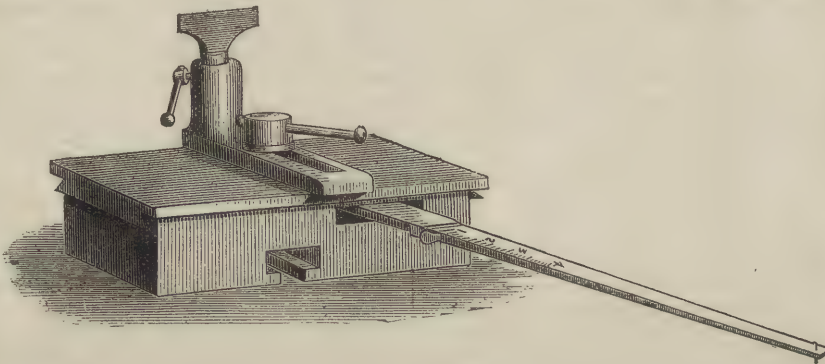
APPARATUS FOR CUTTING SCREWS IN A HAND-TOOL LATHE, BY MESSRS. T. COOKE AND SONS, OF YORK.
